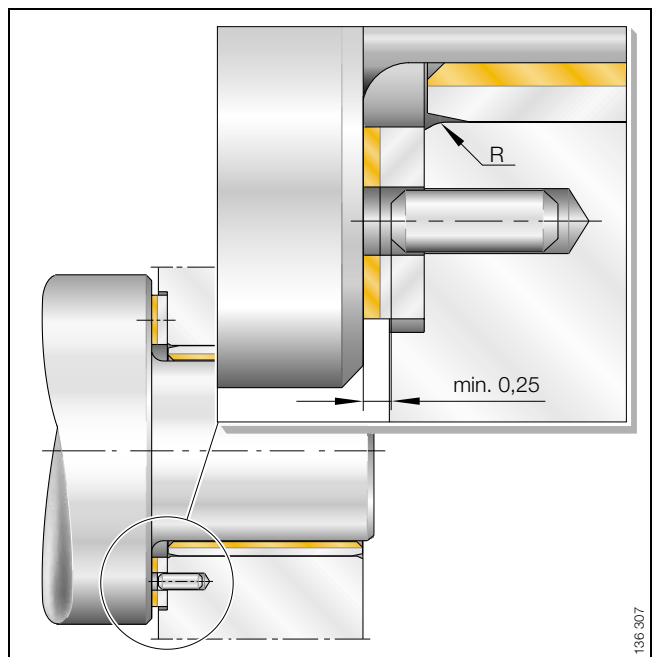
· Location of a PAW thrust washer in a recess in the housing
